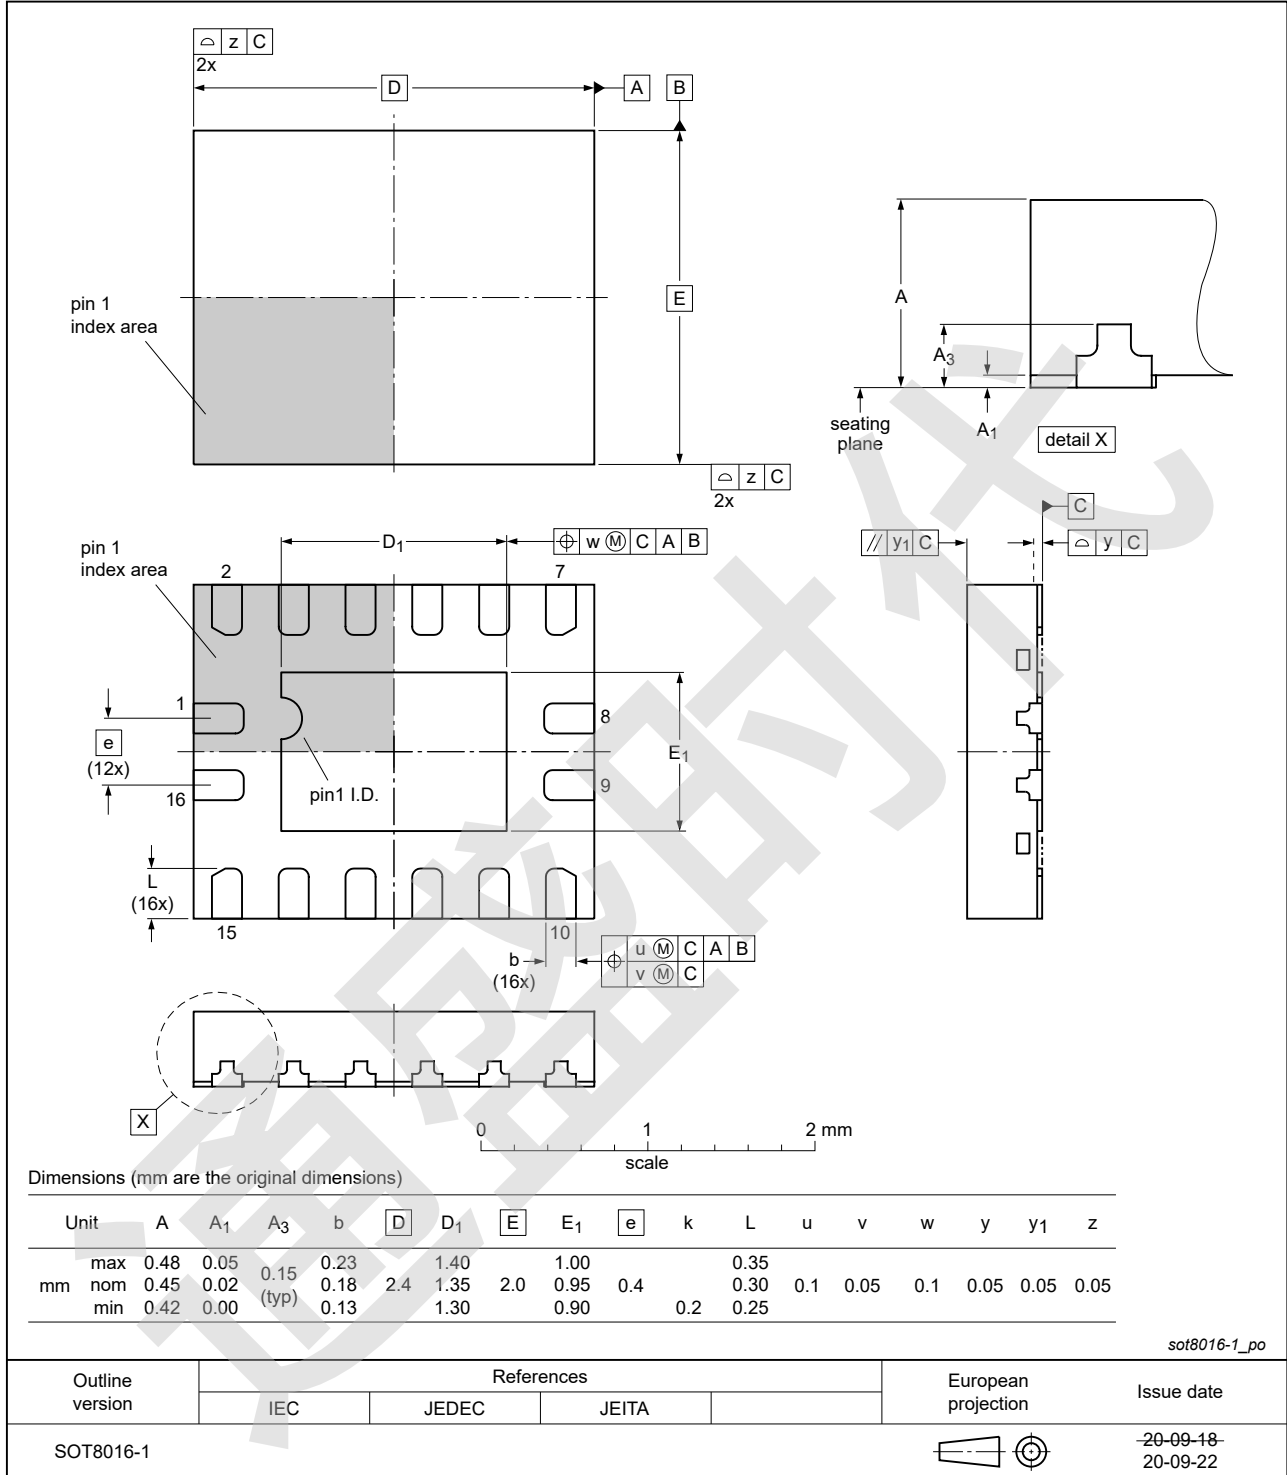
Package outline SOT8016-1 (DHXQFN16)
